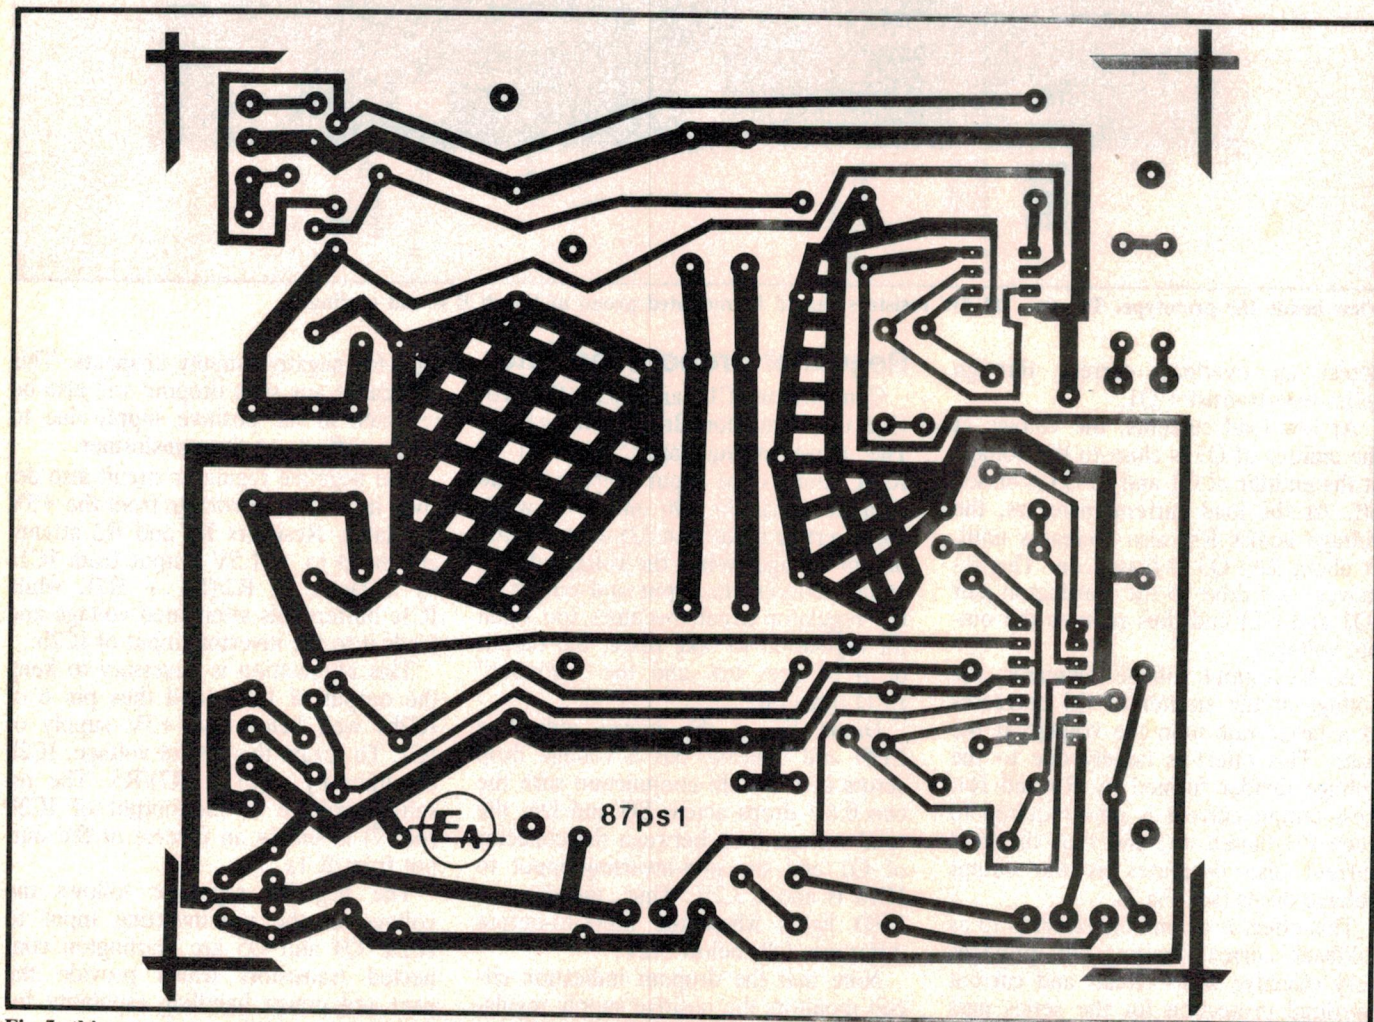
this actual size artwork can be used to make your own PCB. Ready-etched boards are available from retail outlets.
